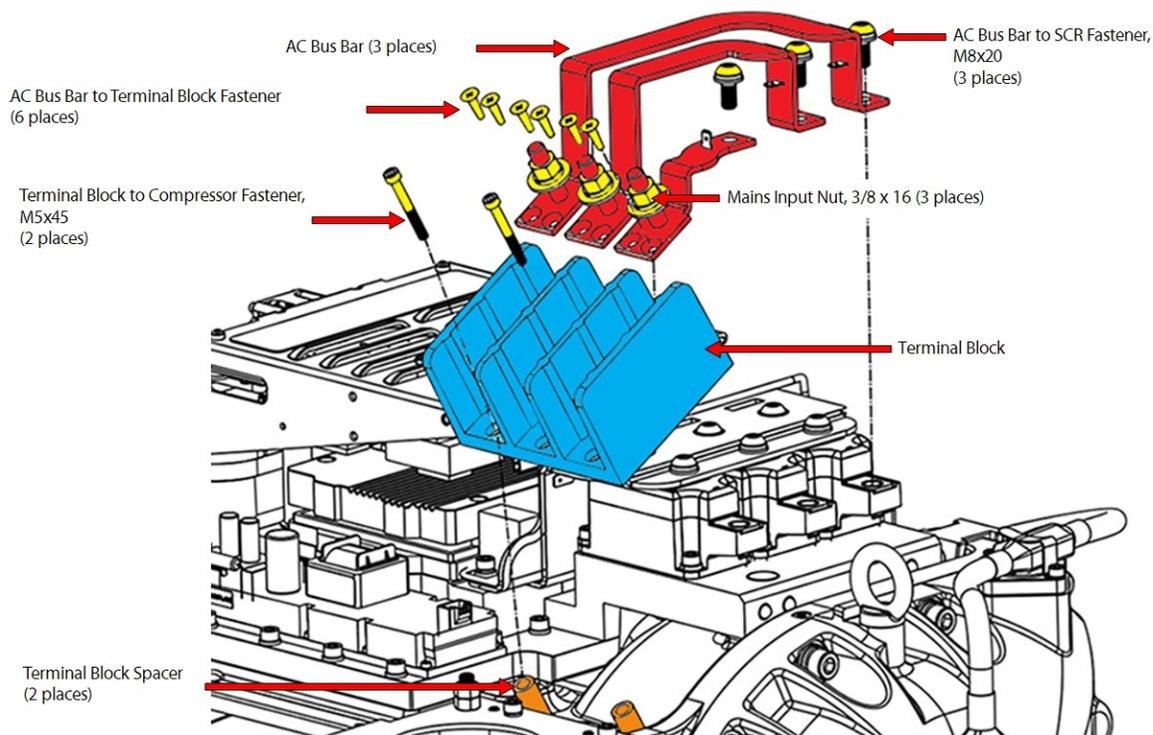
Terminal Block - Input Pressure Screws - TTS300/TGS230
